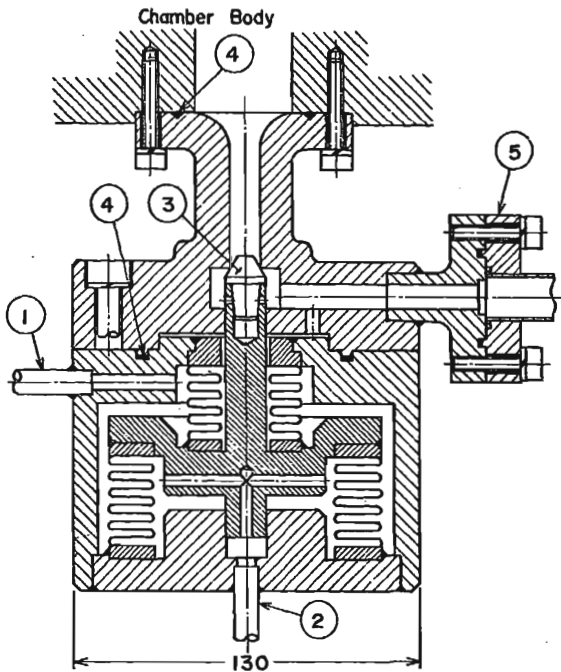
Cross section of the cold valve used at the bottom of the bubble chamber body. (1) pressure inlet to open valve, (2) pressure inlet to close valve, (3) tungsten carbide plug, (4) indium seal, (5) main dump coupling flange.
